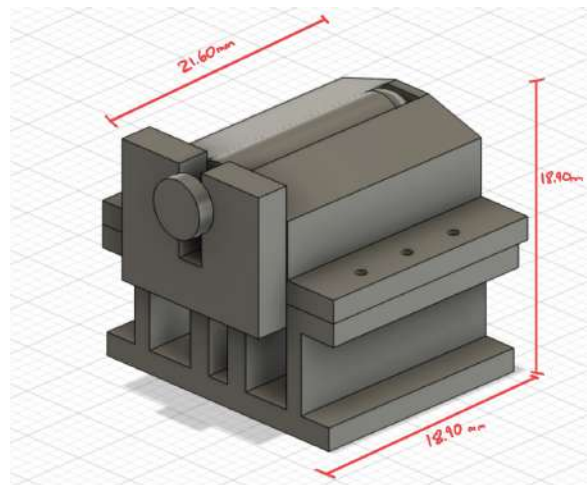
Conical Clutch Design Lock Isometric View (Closed Configuration)
